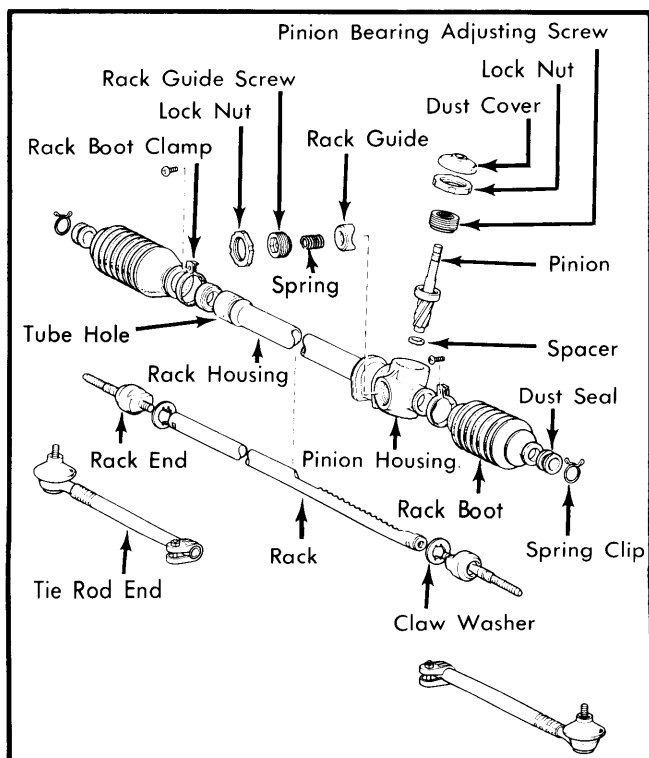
Exploded View of Tercel Rack and Pinion Steering Gear Assembly
